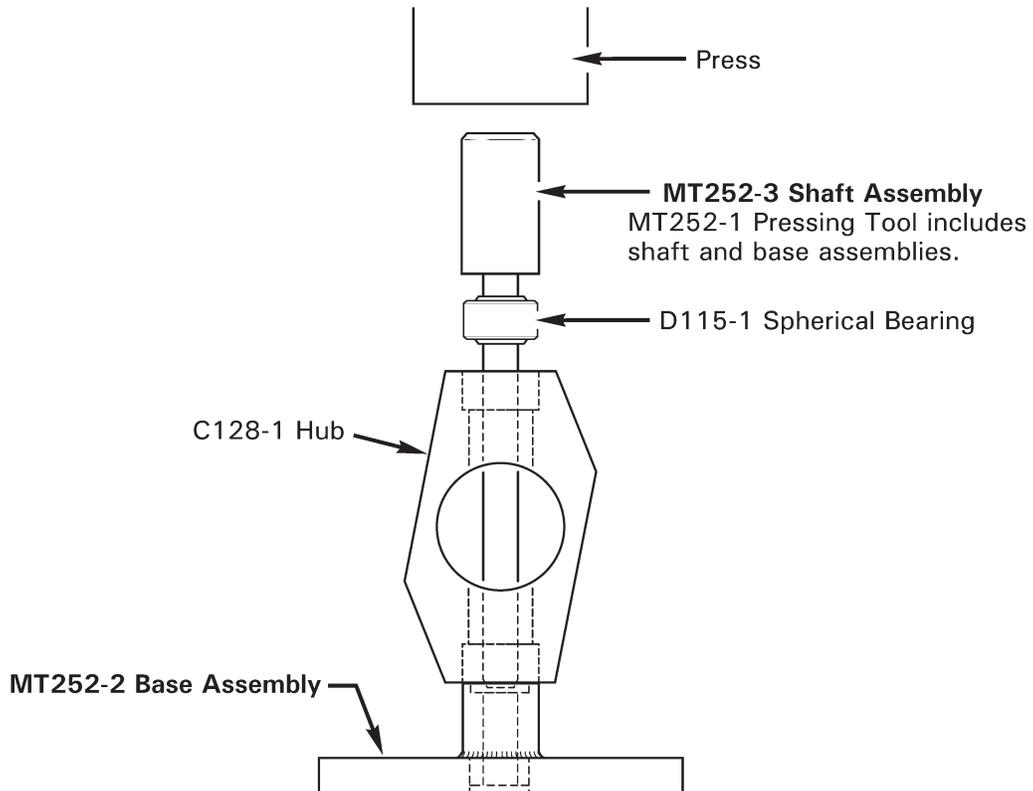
SPHERICAL BEARING INSTALLATION
